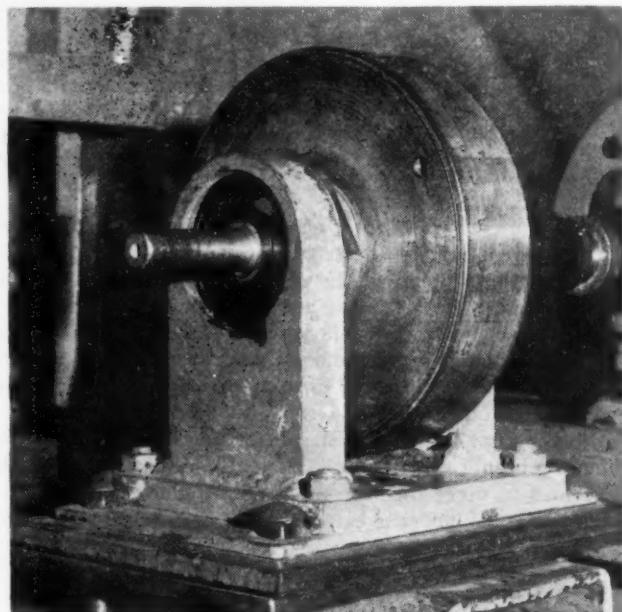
MANUALLY ADJUSTABLE ECCENTRIC WEIGHT USED TO DRIVE SMALL FATIGUE MACHINES
